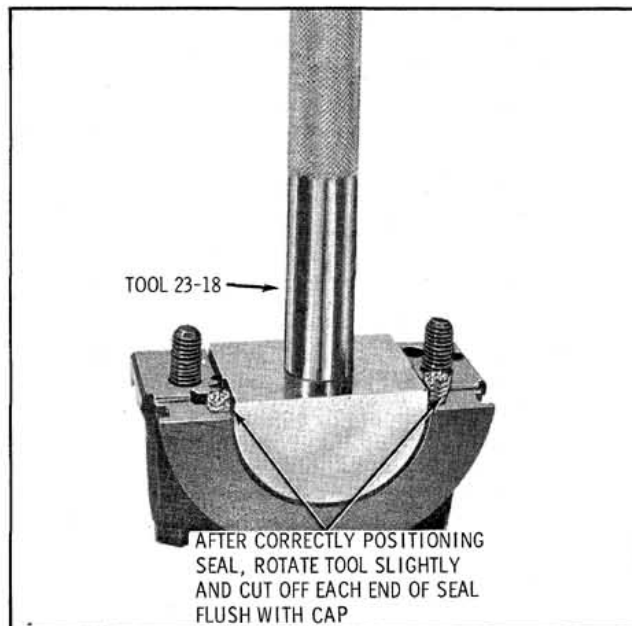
Installing Rear Main Oil Seal Lower Half - 425 Cubic Inch
